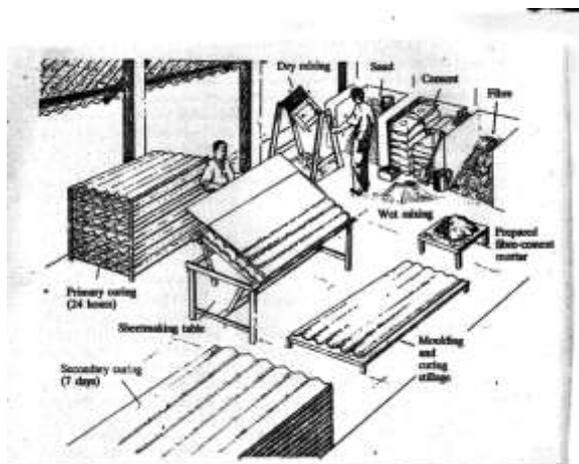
A typical fibre reinforced cement-clay-sand Corrugated roofing sheet production
